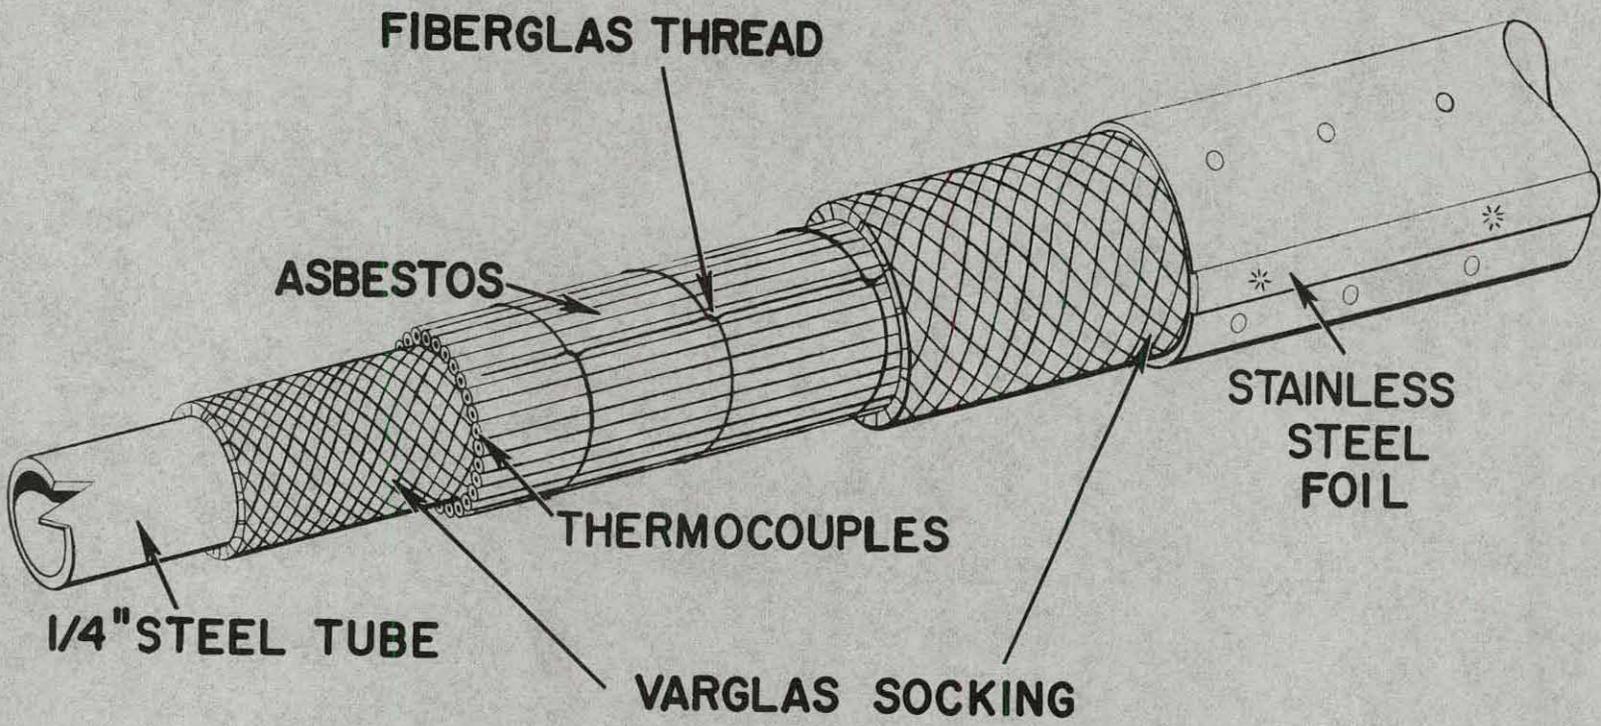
Method of Protecting Asbestos Insulated Thermocouples Inside of MTR-HT-1 Drawbar
